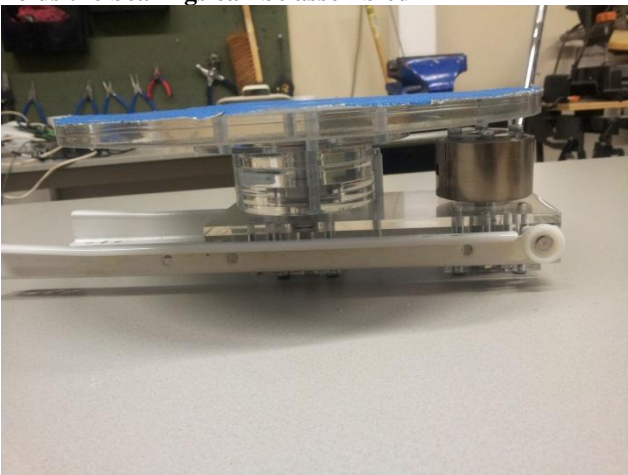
The bottom disc assembly gets assembled in a similar fashion
